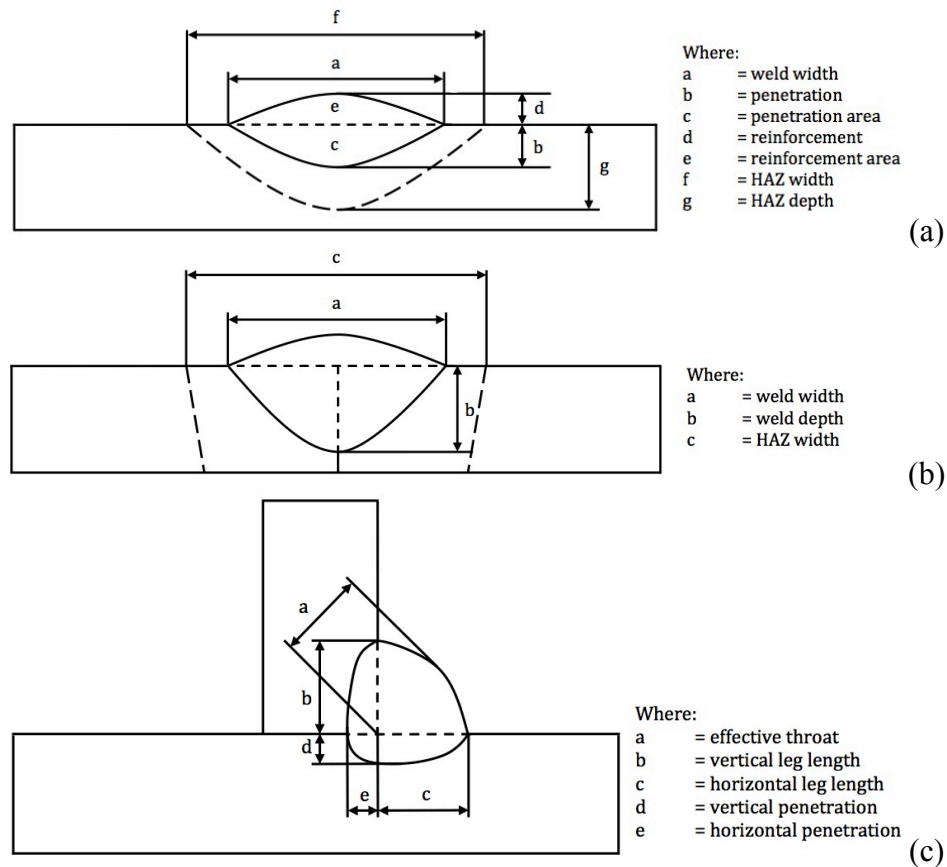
Schematic diagram of weld geometry measurements for (a) bead on plate, (b) butt weld and (c) fillet weld, configurations
